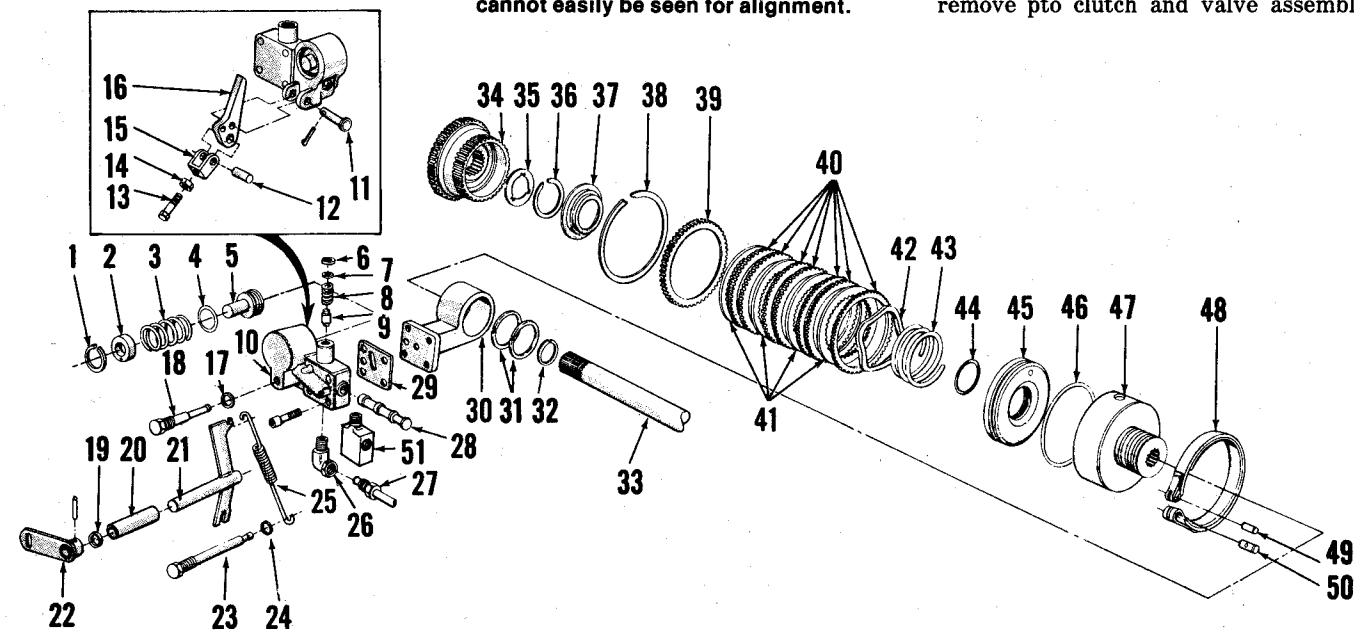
Exploded view of clutch assembly, clutch brake mechanism, control valve assembly and actuating linkage on all models except TW-10, TW-20 and TW-30. Pin (18) is inserted through left side of rear axle center housing and pilots in hole in clutch valve housing (10) to keep the clutch assembly from rotating. Pin (23), also inserted from outer left side of center housing, acts as stop for control arm (21) and also as attaching point for the over-center spring (25). Inset shows view of valve housing from clutch side and the pto brake lever and related parts. On transmissions with Dual Power, regulator valve (51) is used in place of elbow (26). Refer to Fig. 198 for exploded view of pto assembly on Models TW-10, TW-20 and TW-30.
